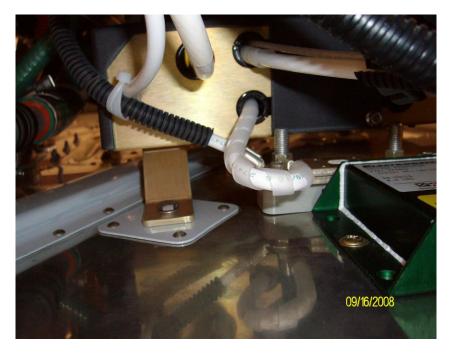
Bottom of Lamar box showing snap bushing and cover modification
